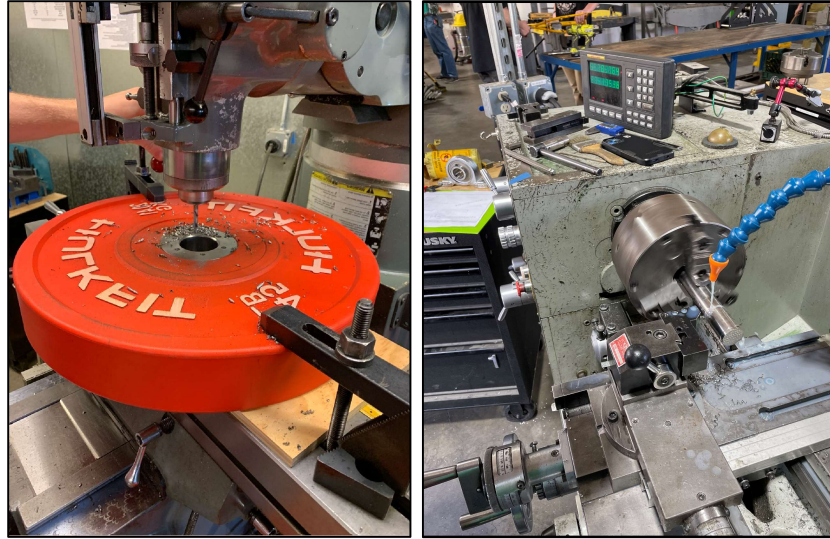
Machining of flywheel mounting holes (left) on manual mill and primary shaft on lathe (right).
